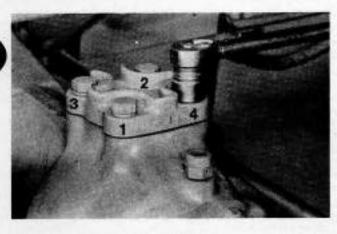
Proper tightening sequence used to install bearing pin cover prior to setting bearing pin preload.
